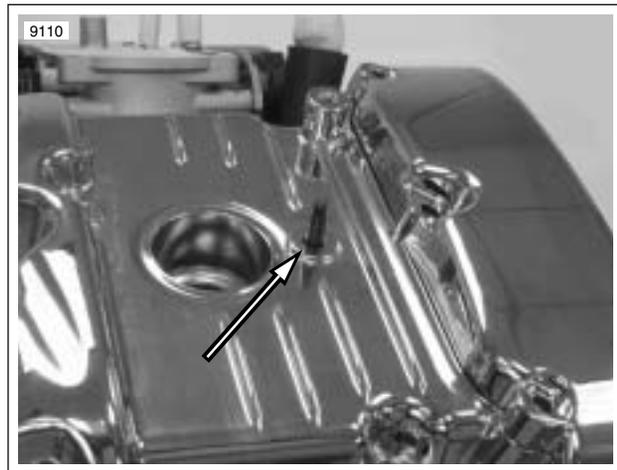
Gasket Alignment Tool (H-D-45340)
